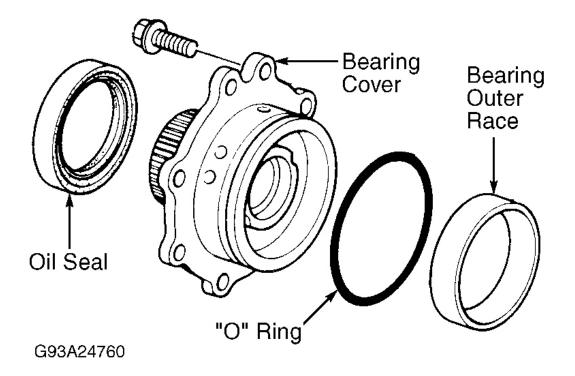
Bearing Cover Assembly Courtesy of MAZDA MOTORS CORP.
